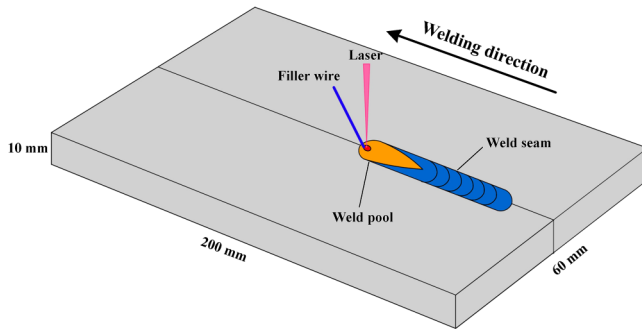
Exemplary sketch for wire feed laser beam welding of 10 mm thick AISI 304 austenitic stainless steel.
